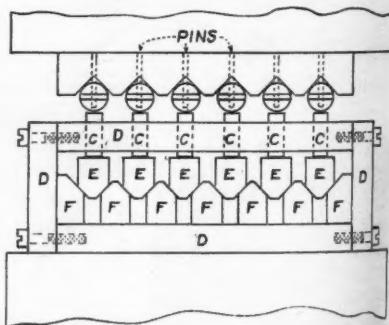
(Above)—Drawing showing method of equalizing the pressure on the work held in a machine vise. Fig. 2 (Right)—This vise may be operated faster, but work-pieces of varying diameters will not always be located centrally.
